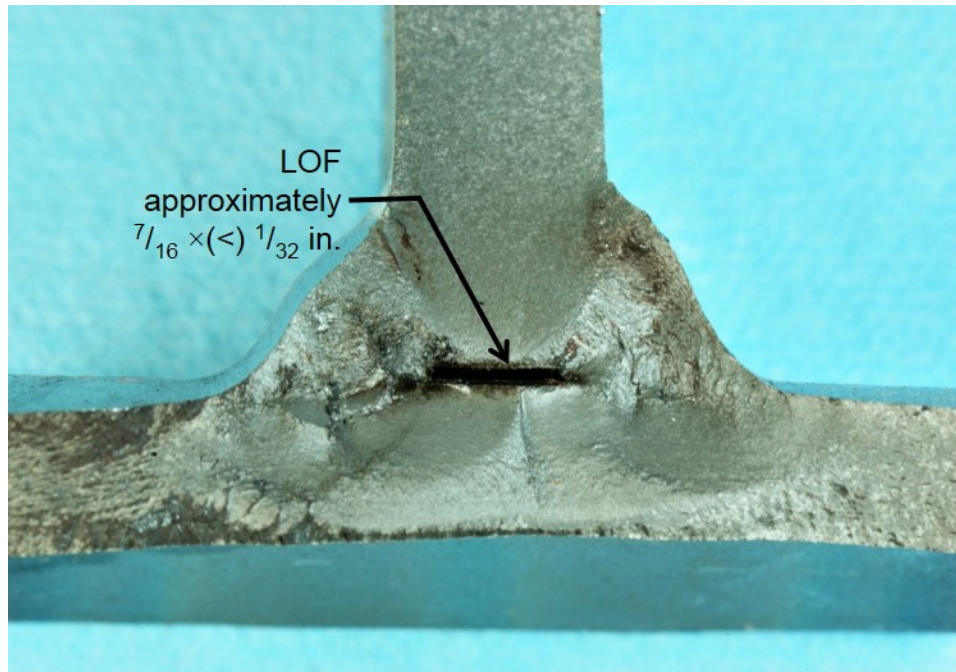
Fracture surface photographed perpendicular to the camera to clarify the LOF — crack to the north of rib in MU2
